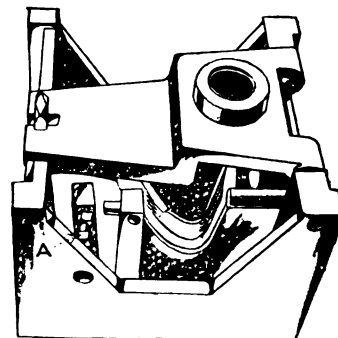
JIG FOR DRILLING AND REAMING CONVEYOR-DRIVE GEAR YOKE
